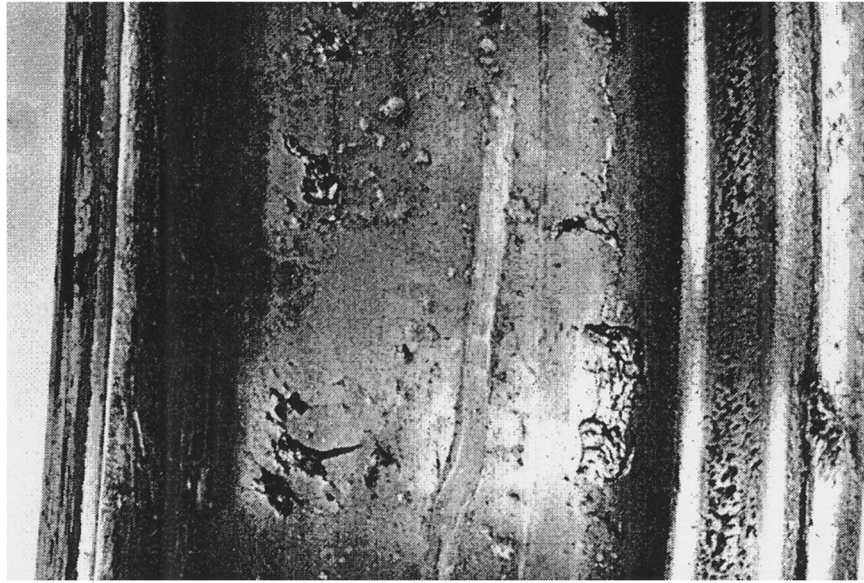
Damage within the wheel tread resulting from surface cracks [4]
